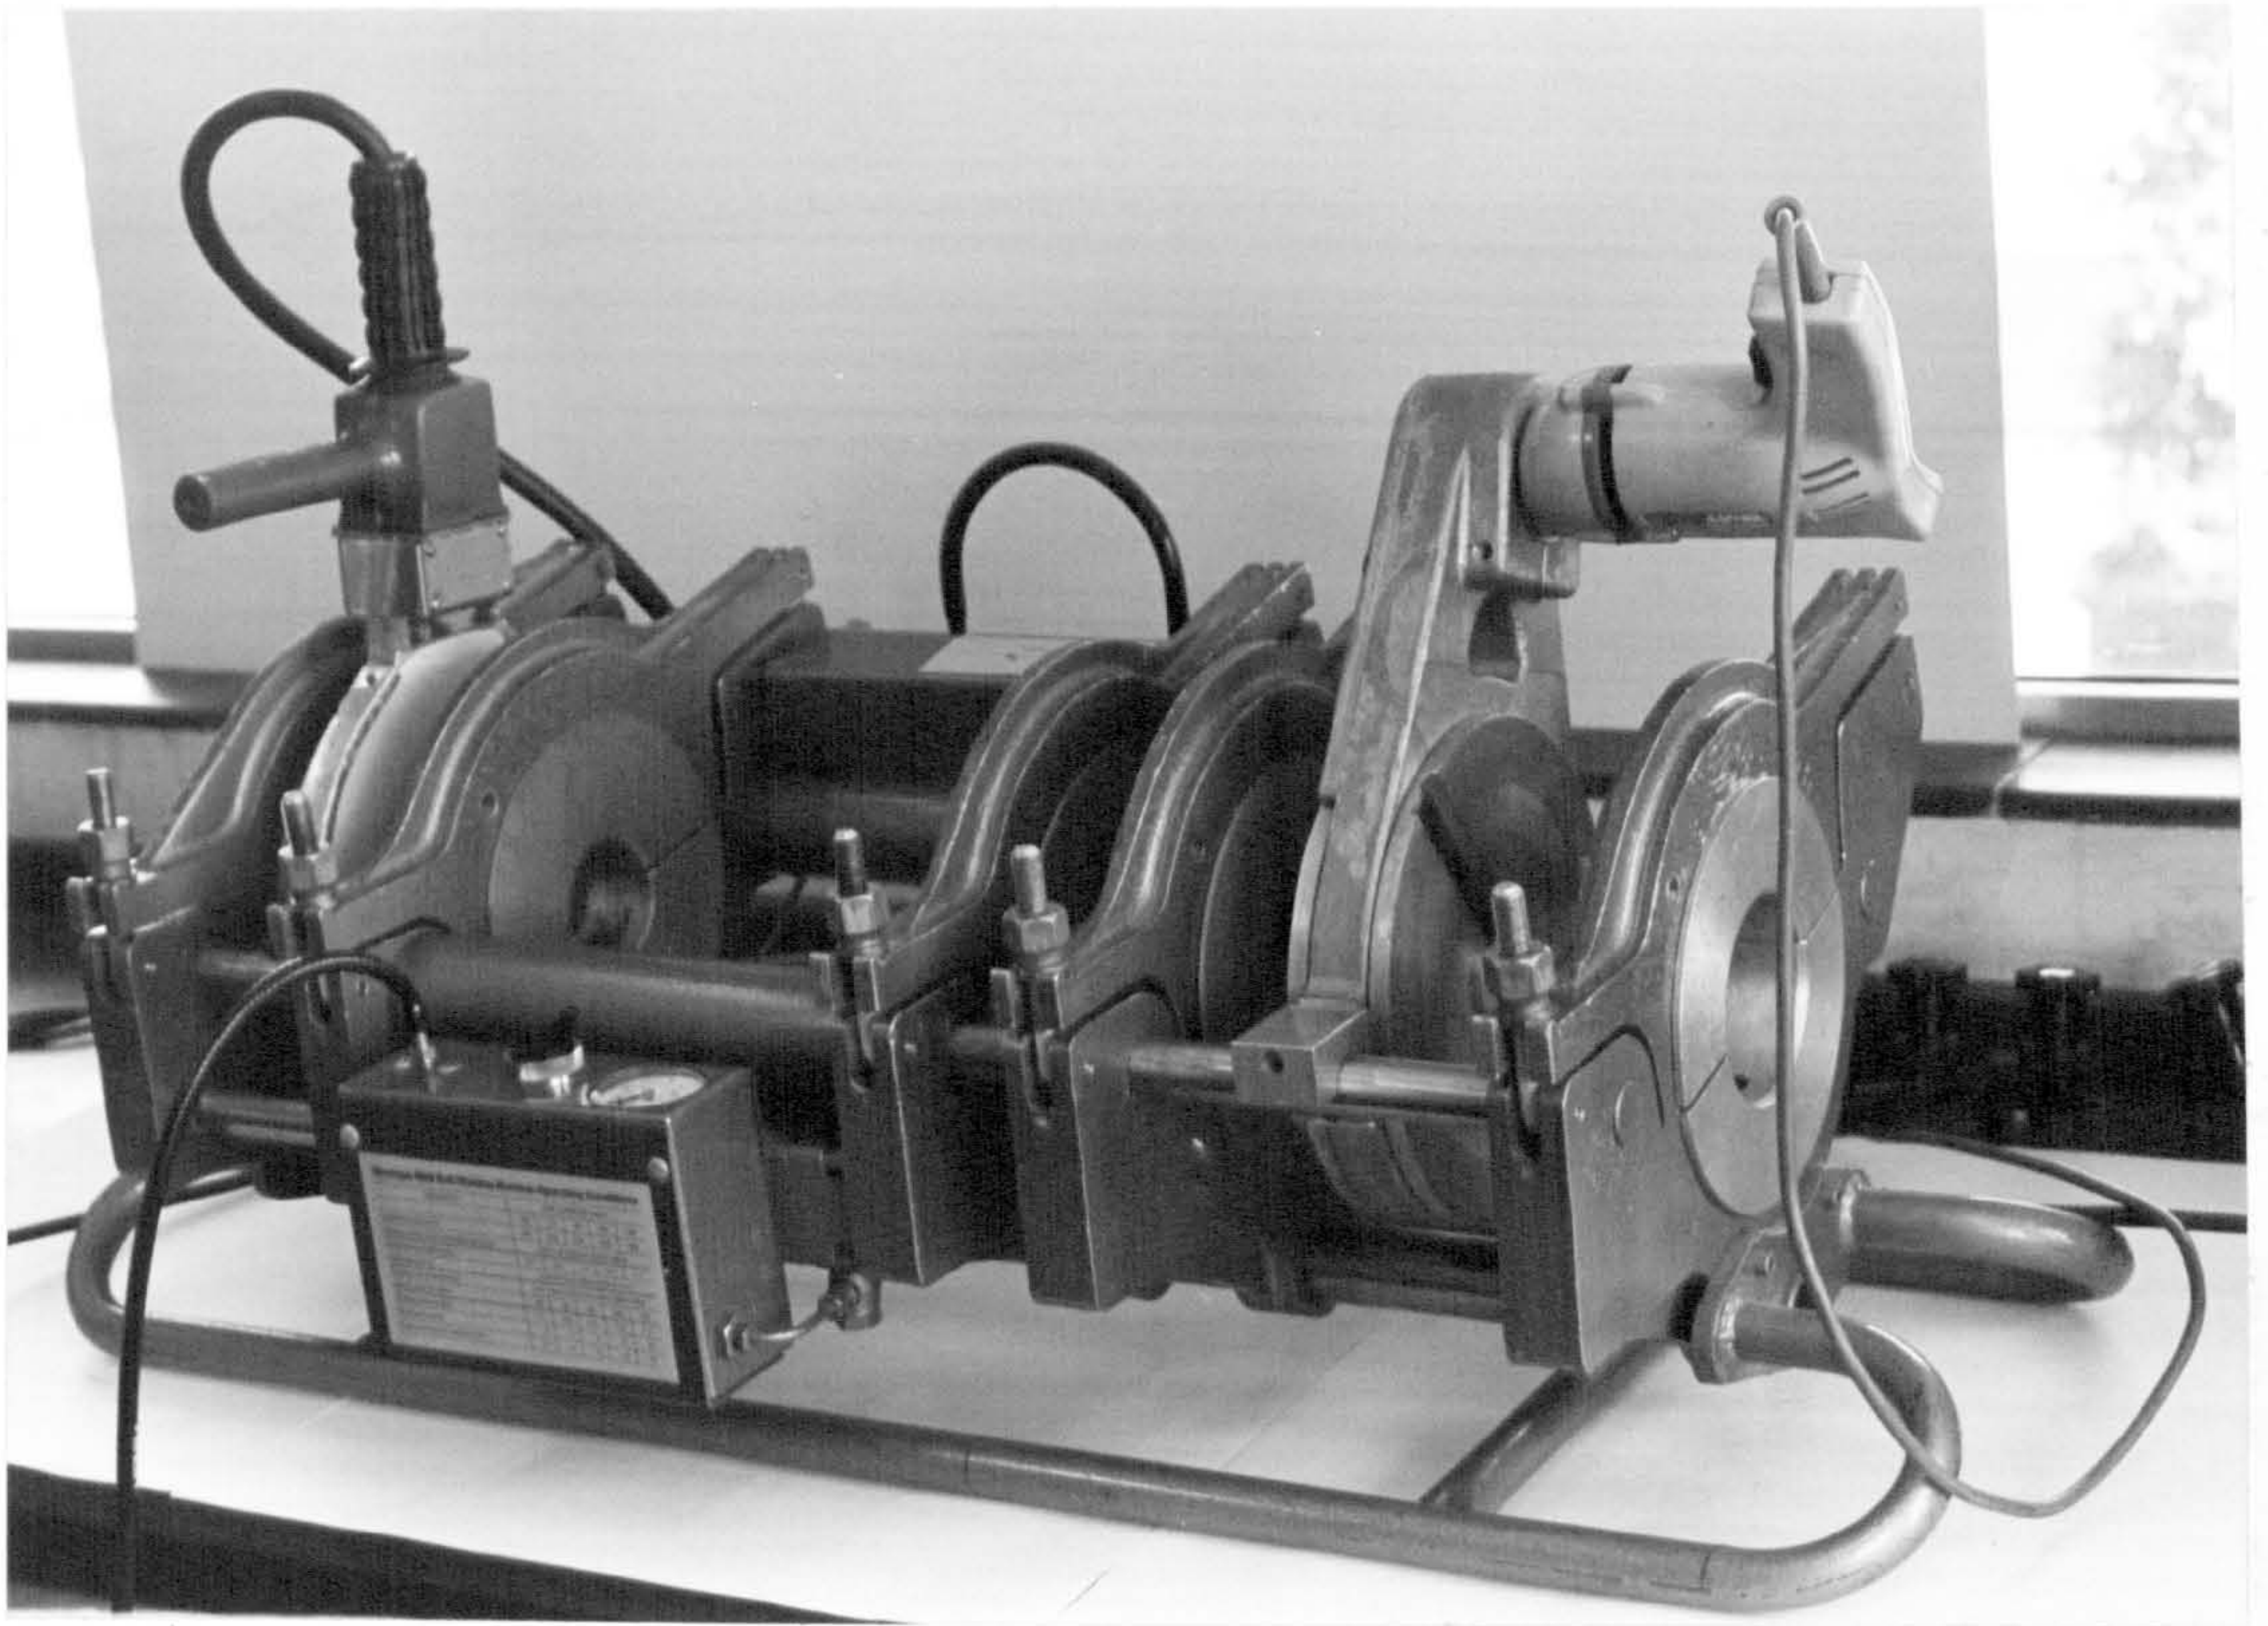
Haxey Mark II mirror-plate butt-welding machine for thermoplastics pipe systems.
